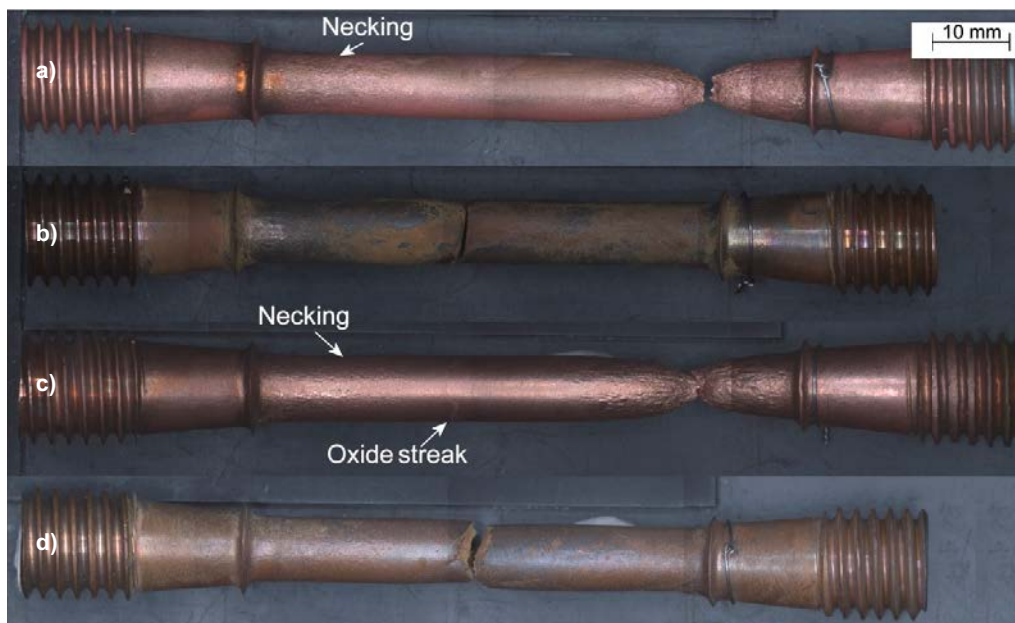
Cross-weld tensile test specimens from segment 1 and 2 with about 1 and 6–11 μm initial oxide layer thicknesses after hot tensile testing at a) segment 1, 75 °C, b) segment 1, 175 °C, c) segment 2, 75°C and d) segment 2, 175 °C.
